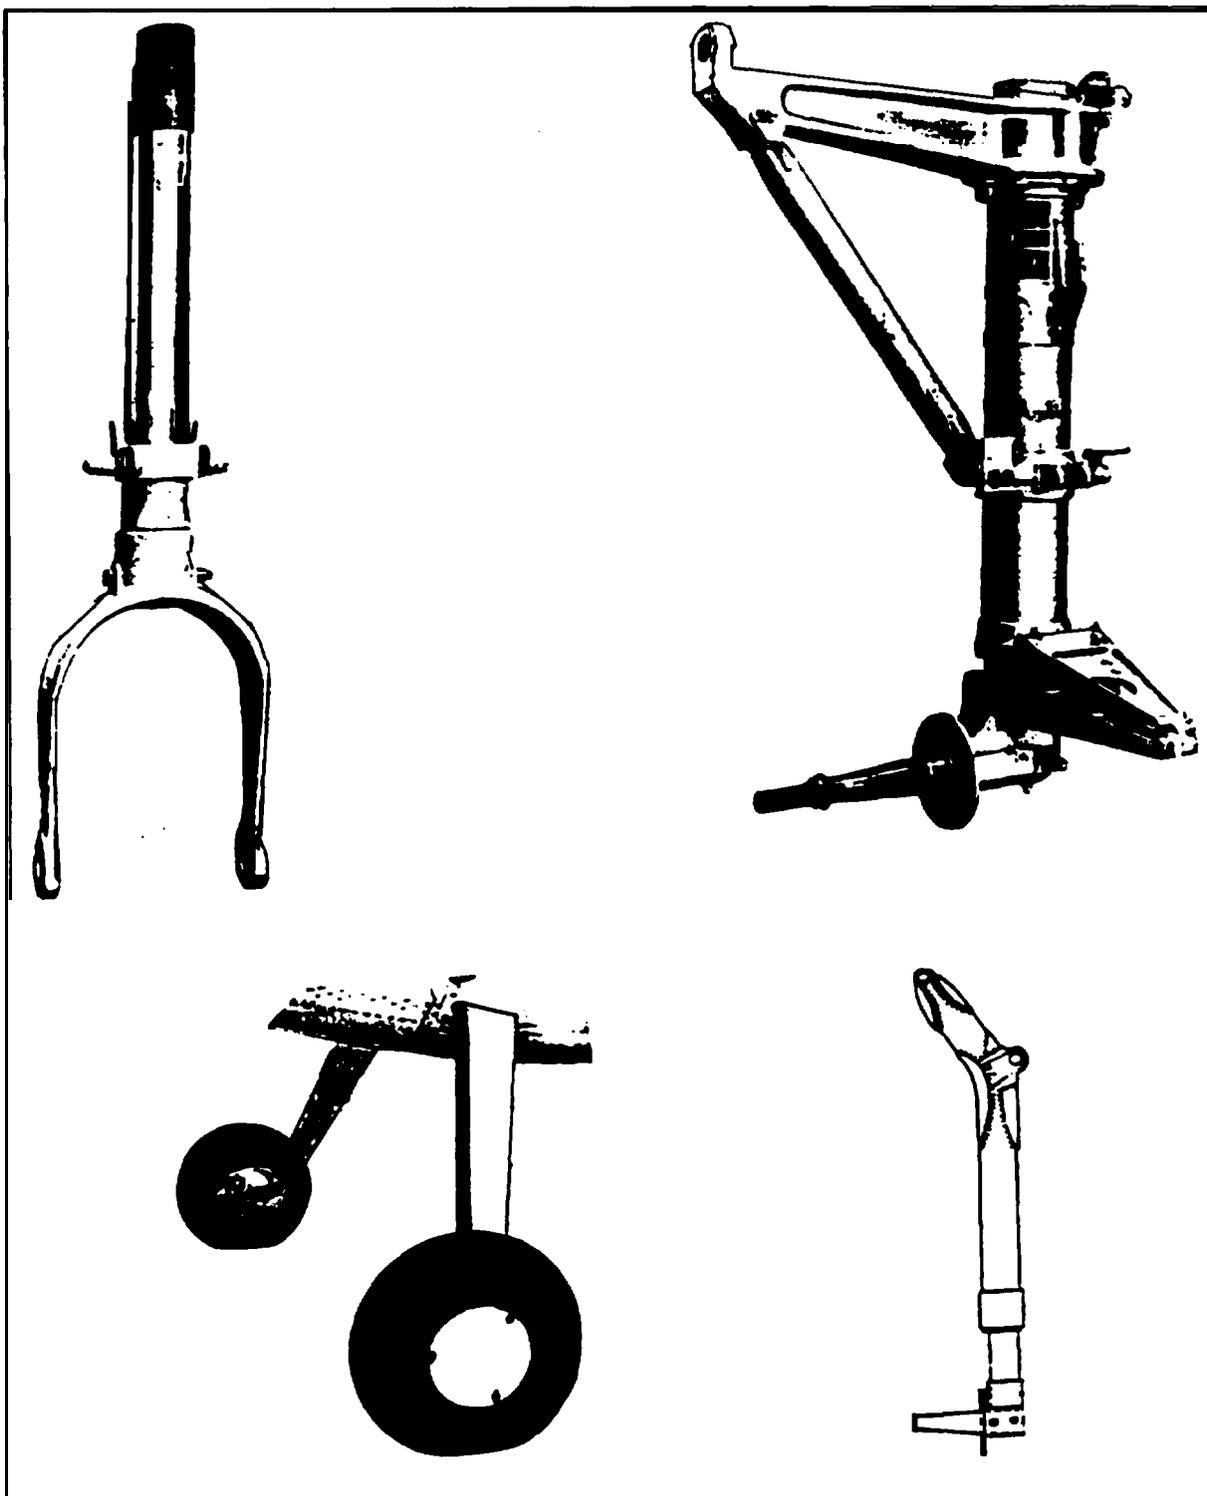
Landing gear assemblies that CANNOT be repaired by welding.
